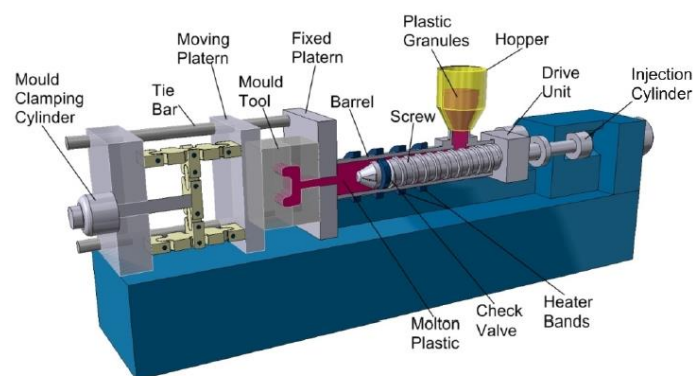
1 : Injection Moulding Machine (Groover, 2010)
